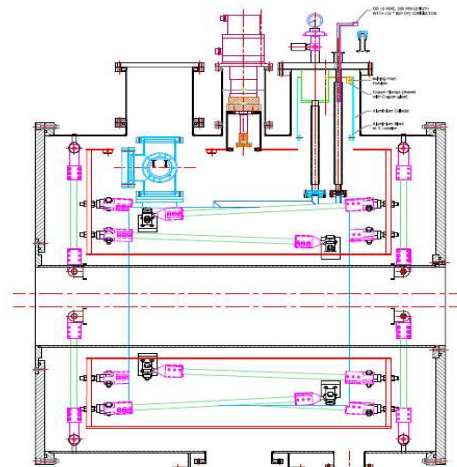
Cross sectional details of liquid helium cooled SC magnet
